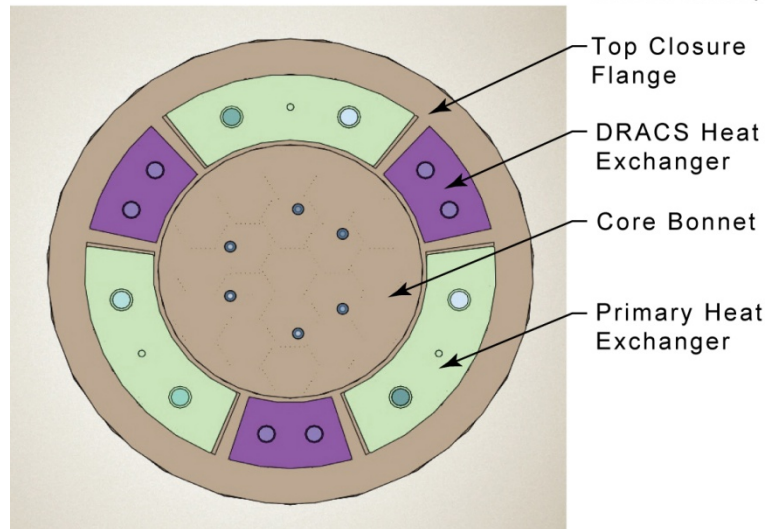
Reactor vessel flange, top closure flange, and core bonnet (top view).
